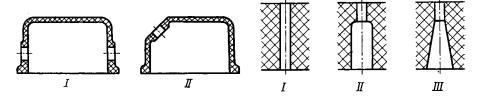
Holes arranged square (I) or oblique (II) to the direction of mould opening
